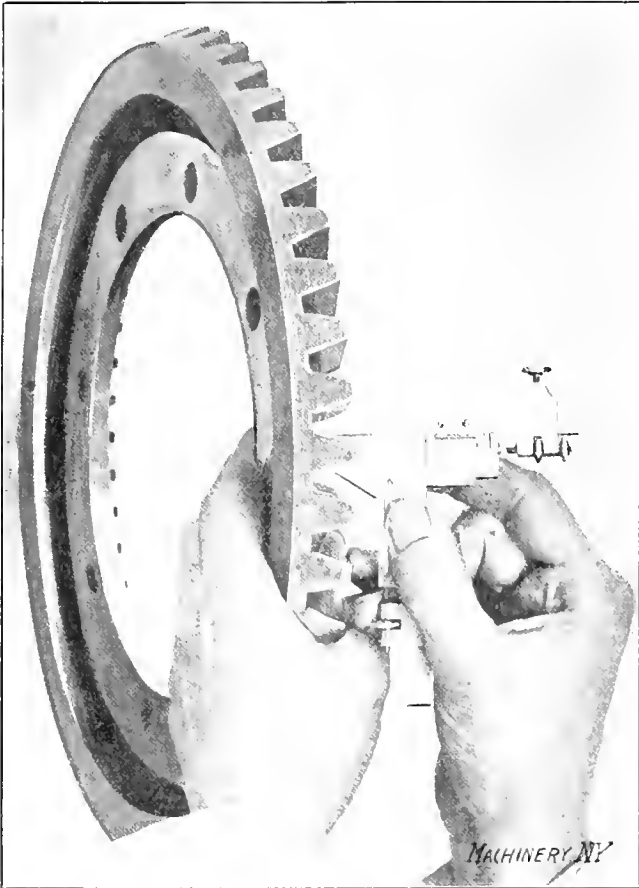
Brown & Sharpe Gear-tooth Caliper in Use
